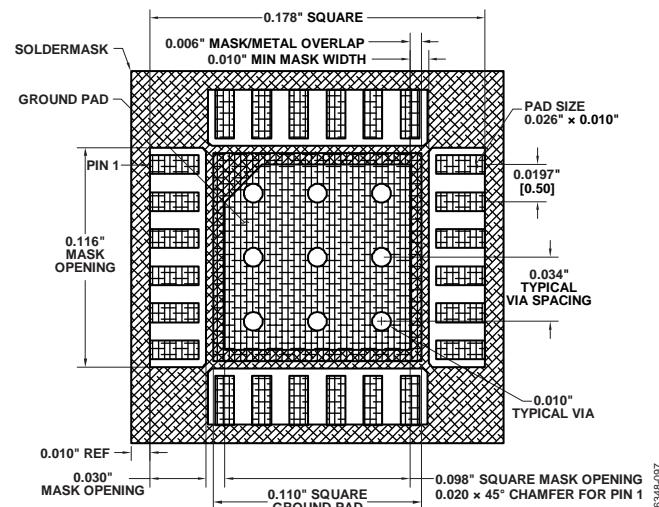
EV1HMC951ALP4 PCB Land Pattern Footprint
